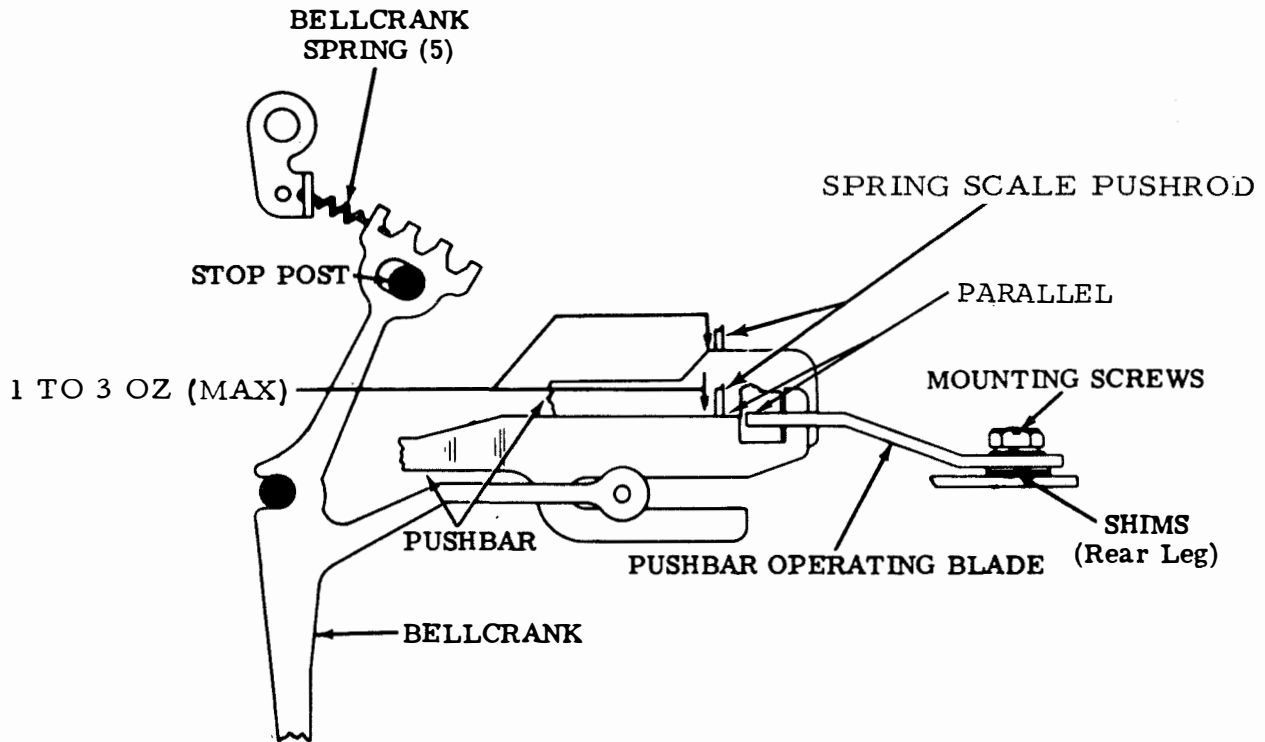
Pushbar Operating Blade (Preliminary) and Bellcrank Springs, Front View
